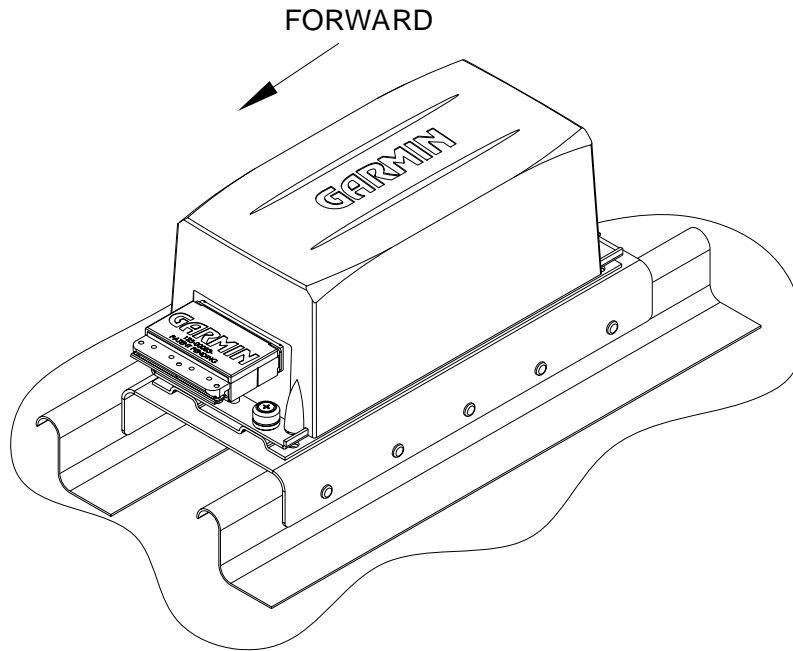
Mounting Bracket Attachment to Stringers or Longerons
